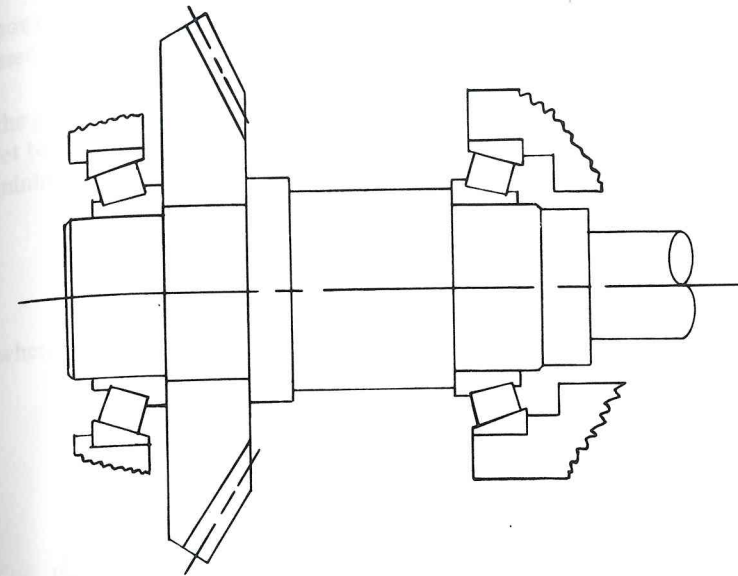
Tapered roller bearings in straddle-mounted configuration.
